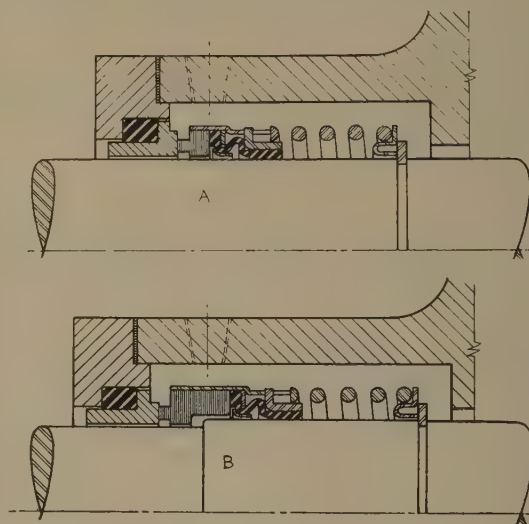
(a) TYPICAL STANDARD MECHANICAL SEAL CONSTRUCTION (b) TYPICAL BALANCED MECHANICAL SEAL CONSTRUCTION
